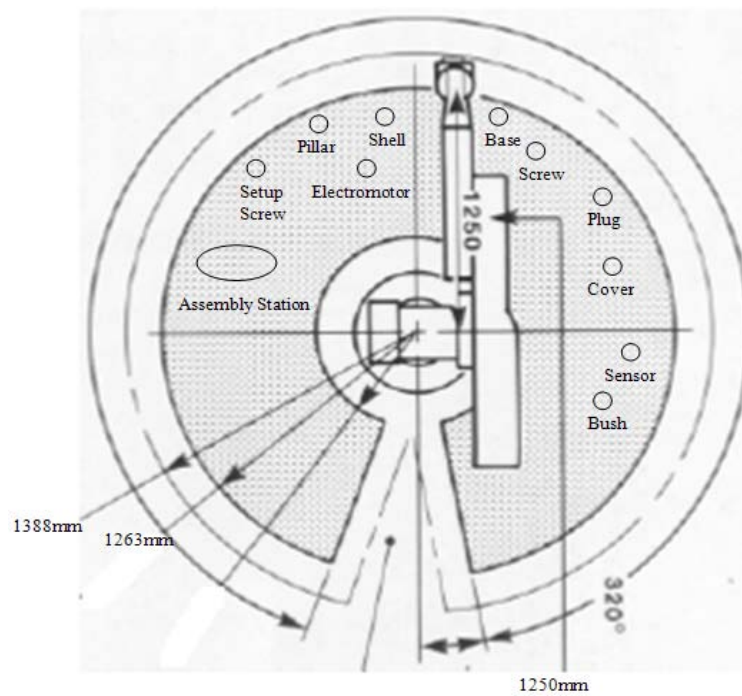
Workcell-2 for driver assembly with Puma-762 Robot
